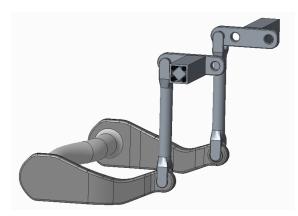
The Spring strut concept, a torsional rubber spring that can be locked by a locking pin in one of the holes.
